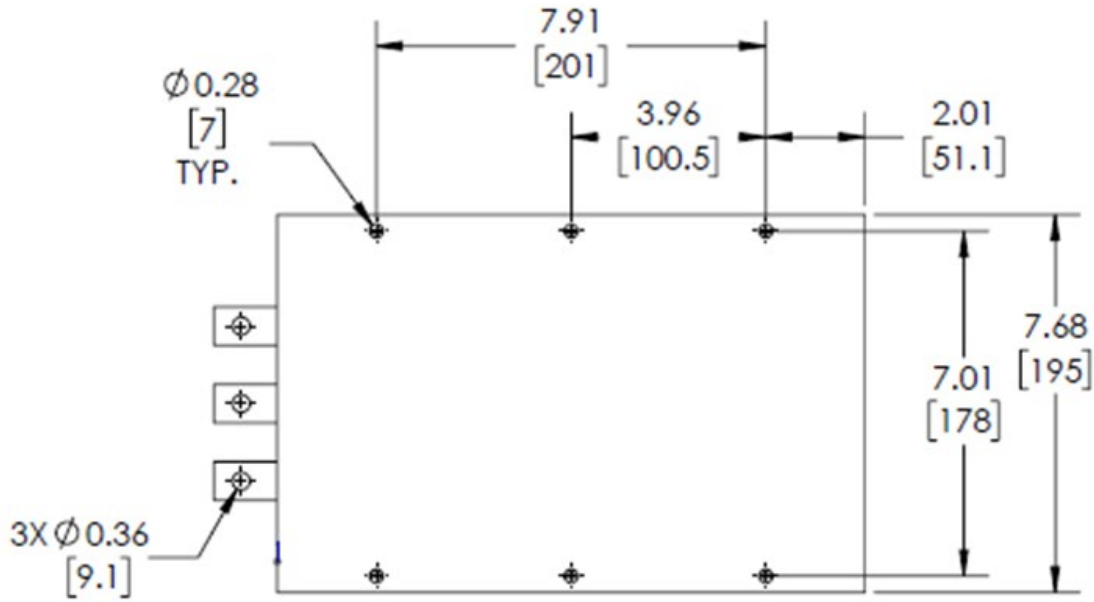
Base Plate Mounting Hole Locations – 3.3, 5.0, and 6.5
